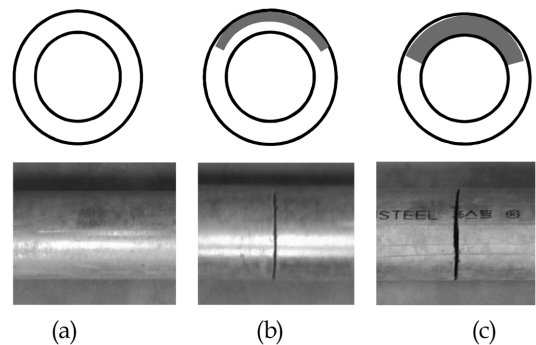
Defect types fabricated in steel pipes: (a) no damage, (b) defect with half cut, and (c) defect with full cut
